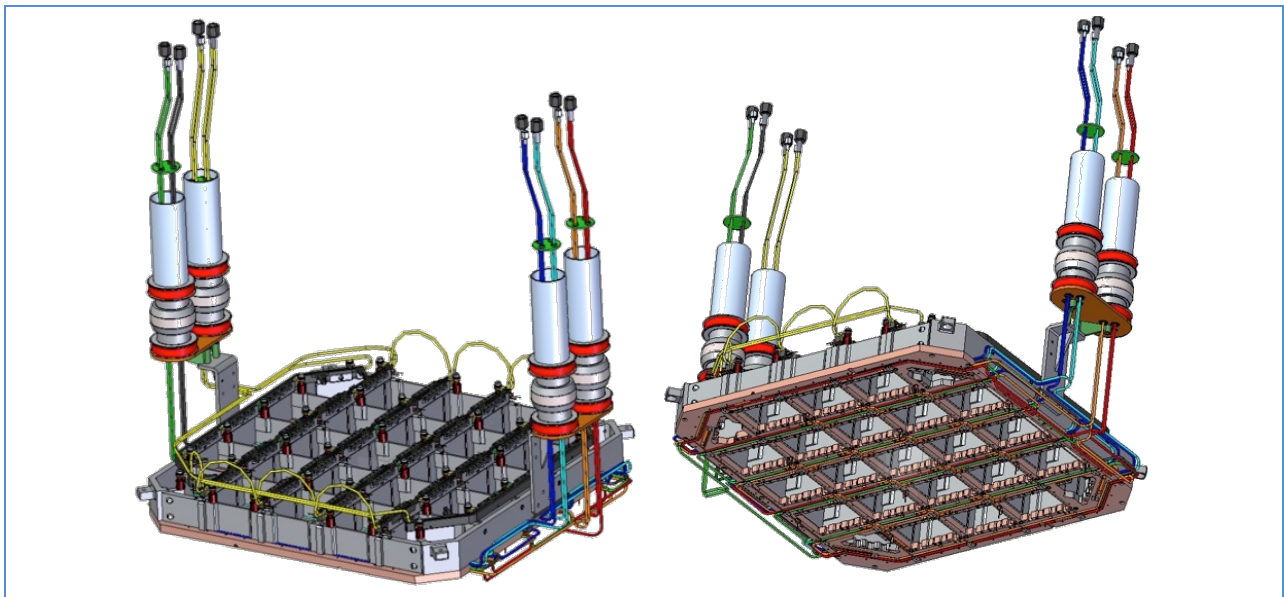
The complete cryo-cold plate (bottom and top views)
